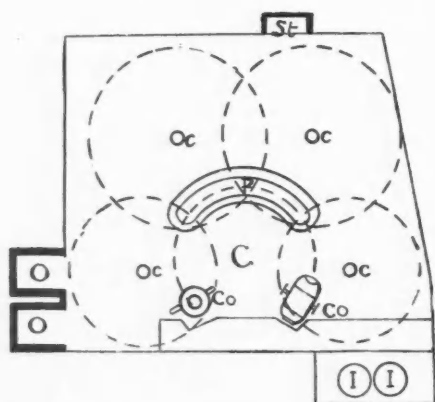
BESSEMER PLANT, AXES DIVERGING.
